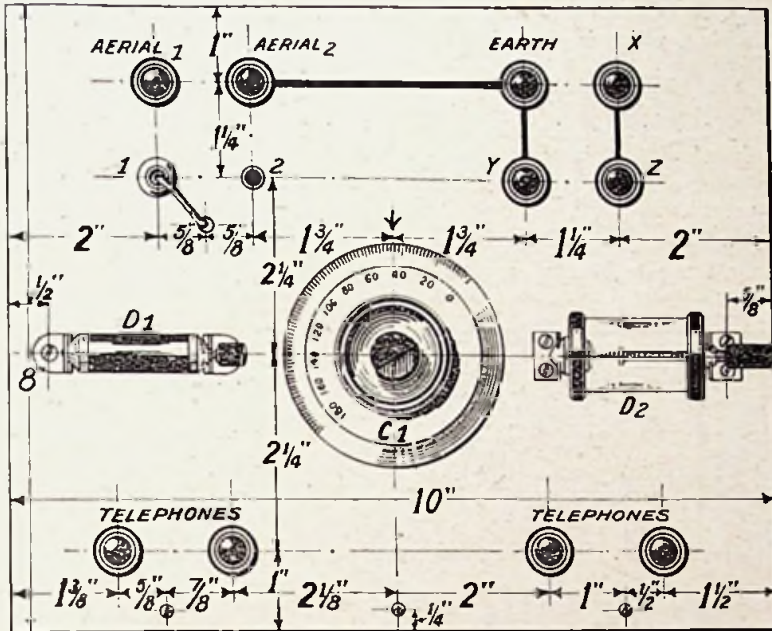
The layout is attractive in appearance. Dimensions may be taken from this diagram. Blueprint No. C. 1072 A.
